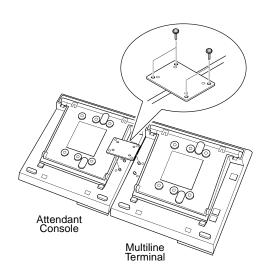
Connecting an Attendant Console to a Multiline Terminal
